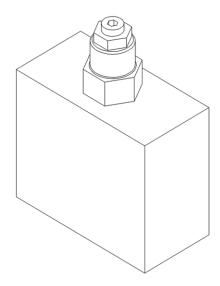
ADJUSTING THE SEQUENCE VALVE (SCCA-LAN)
